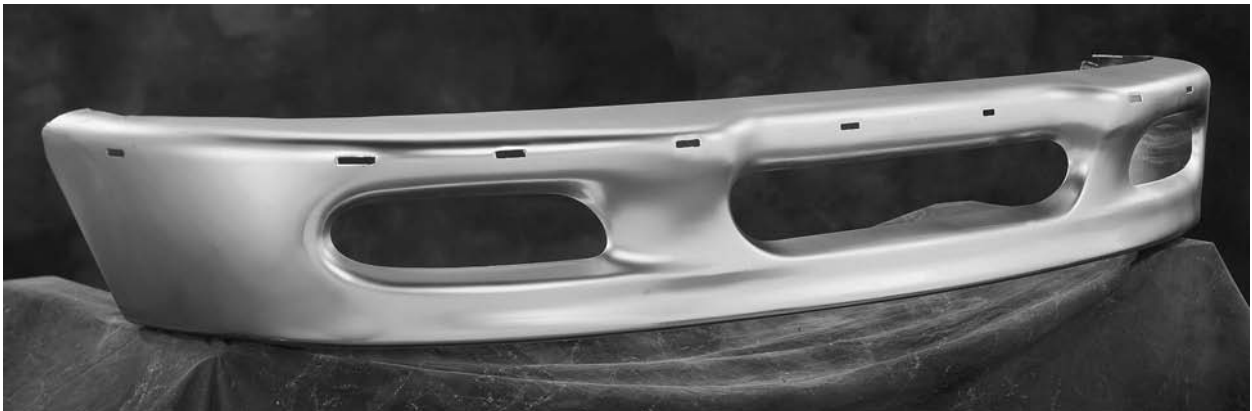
The Ford F150 Pick-up (1996) has a cold stamped bumper beam [6].
